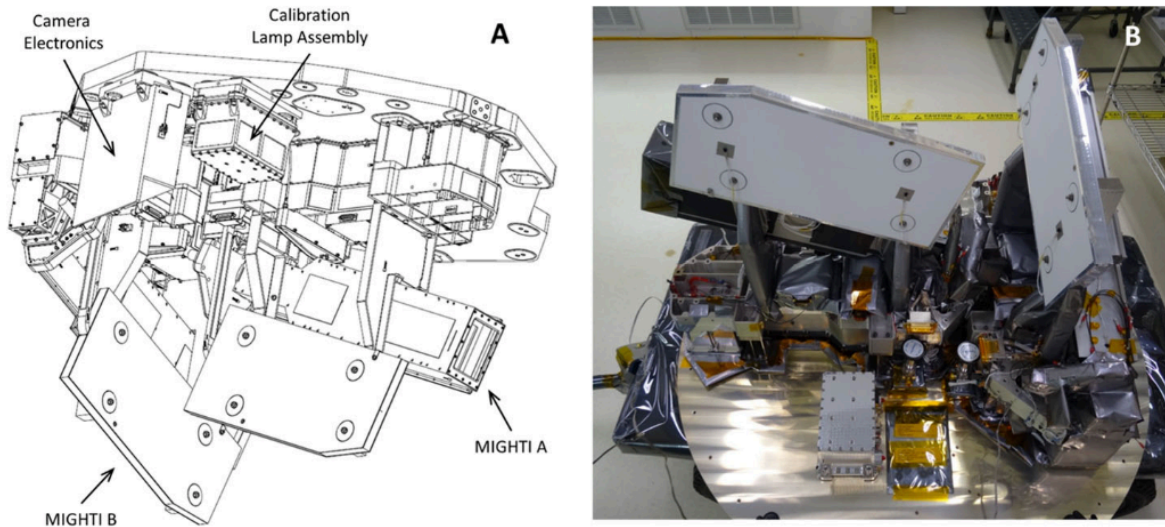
shows the optical sensors and the calibration lamp assembly prior to the integration onto the payload interface plate
